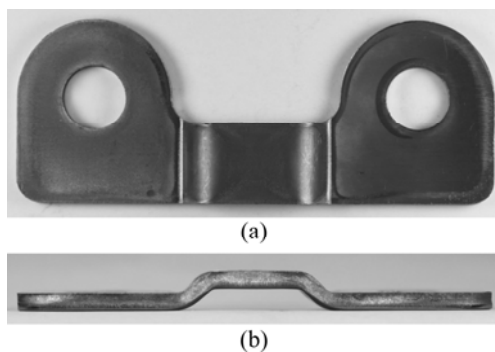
Ultra-high strength stainless steel part produced by one shot hot stamping: (a) Front; (b) Side
